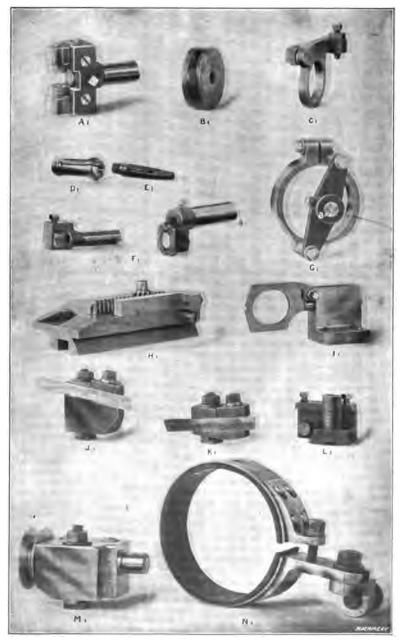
Representative Group of Standard Tools and Attachments for the Brown & Sharpe Automatic Screw Machines
